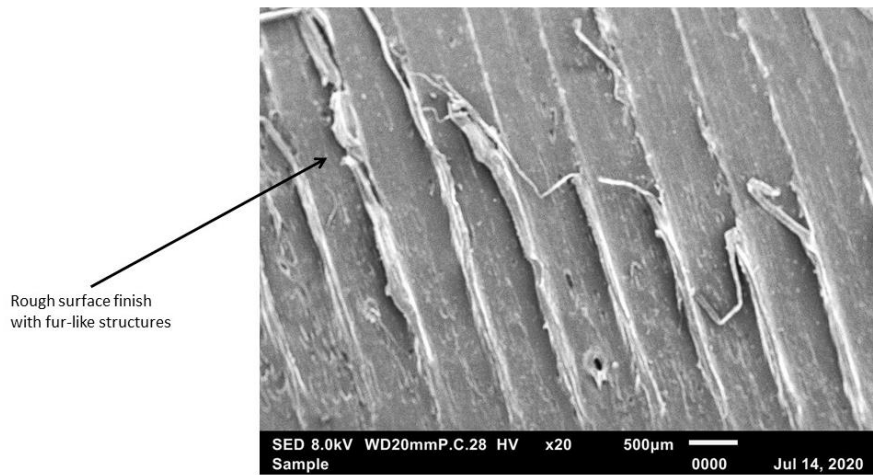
Top view of the printed part with 0.3 mm layer thickness under SEM microscopy [64].
